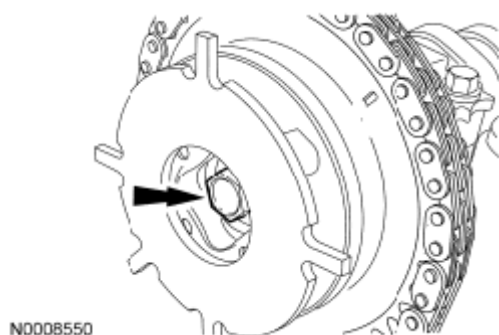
Locating Camshaft Phaser And Sprocket Bolt
